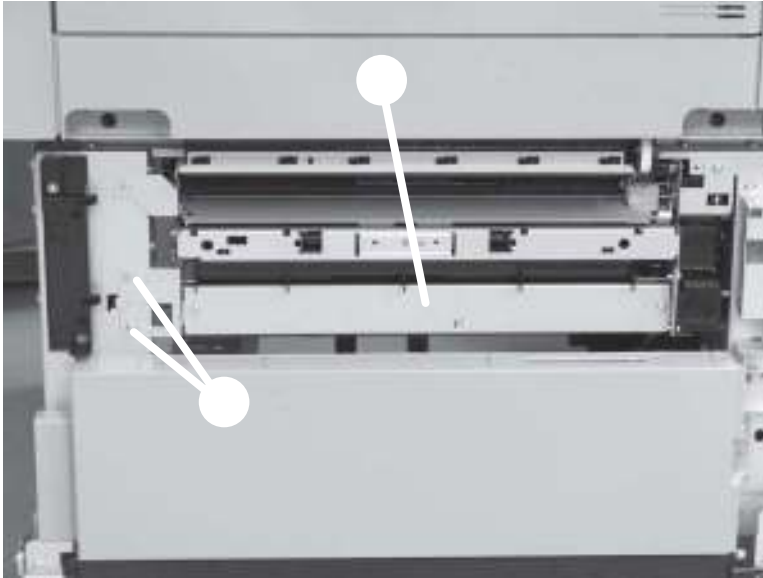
Remove the HCI right tray pickup assembly (1 of 2)
